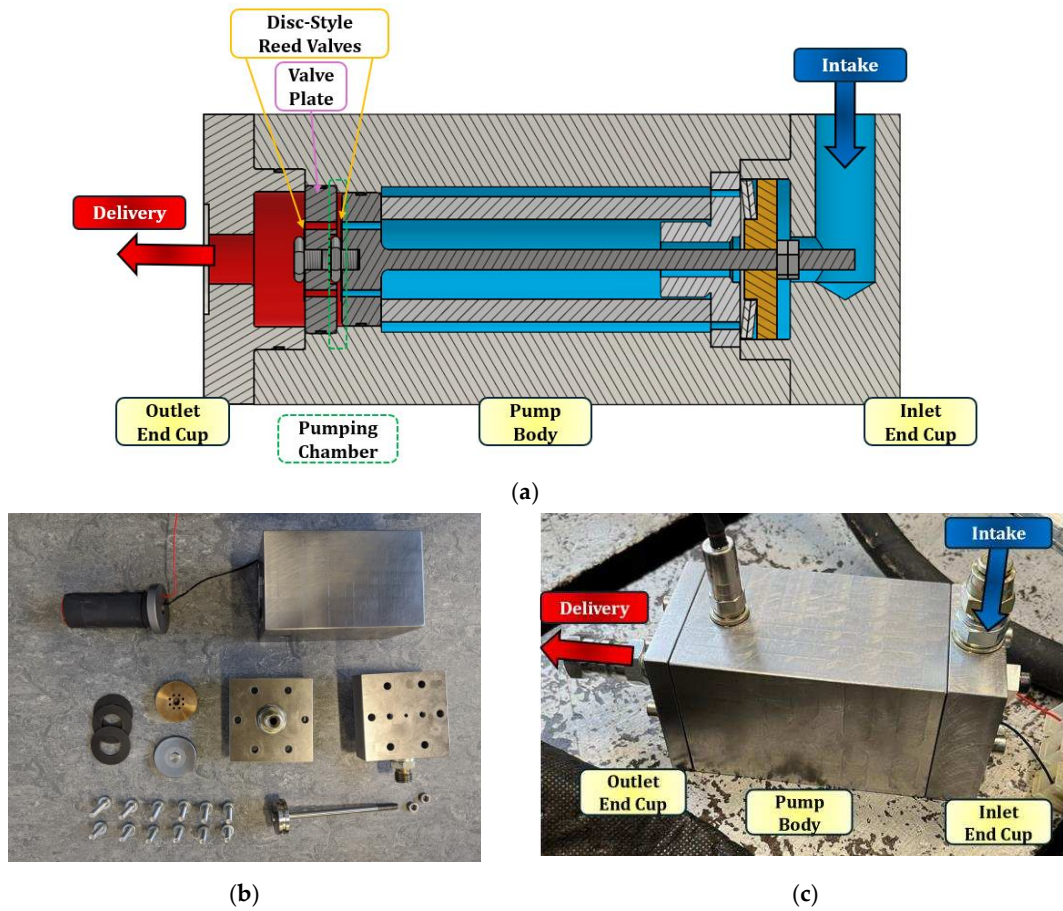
Piezohydraulic pump developed at the University of Bath [271]: (a) Longitudinal section view of the entire pump; (b) Thick disc-style reed valve with corresponding valve screw; (c) Assembled pump prototype.
